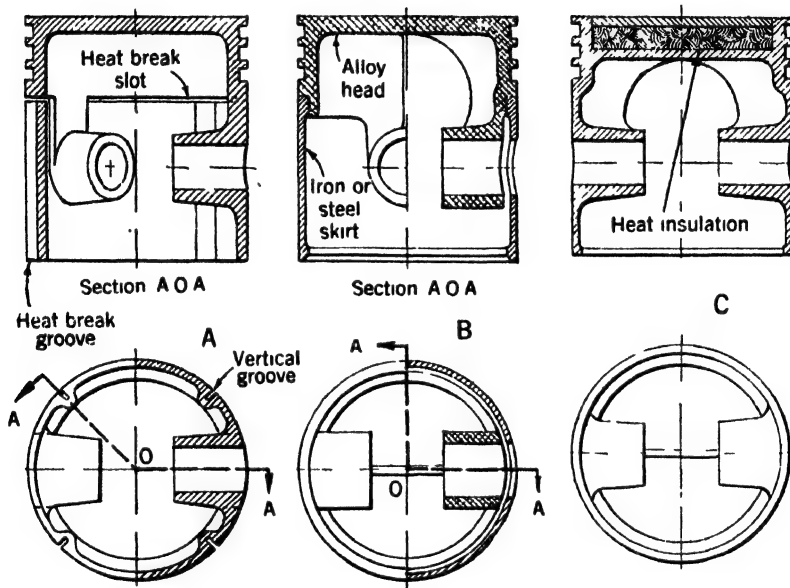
Sectional Views of Various Piston Designs Intended to Prevent Excessive Heat Transfer. A—Piston with Longitudinal and Vertical Grooves. B—Composite Piston Using Alloy Head with Iron or Steel Skirt. C—Piston with Heat Insulating Material in the Head, an Experimental Construction.
